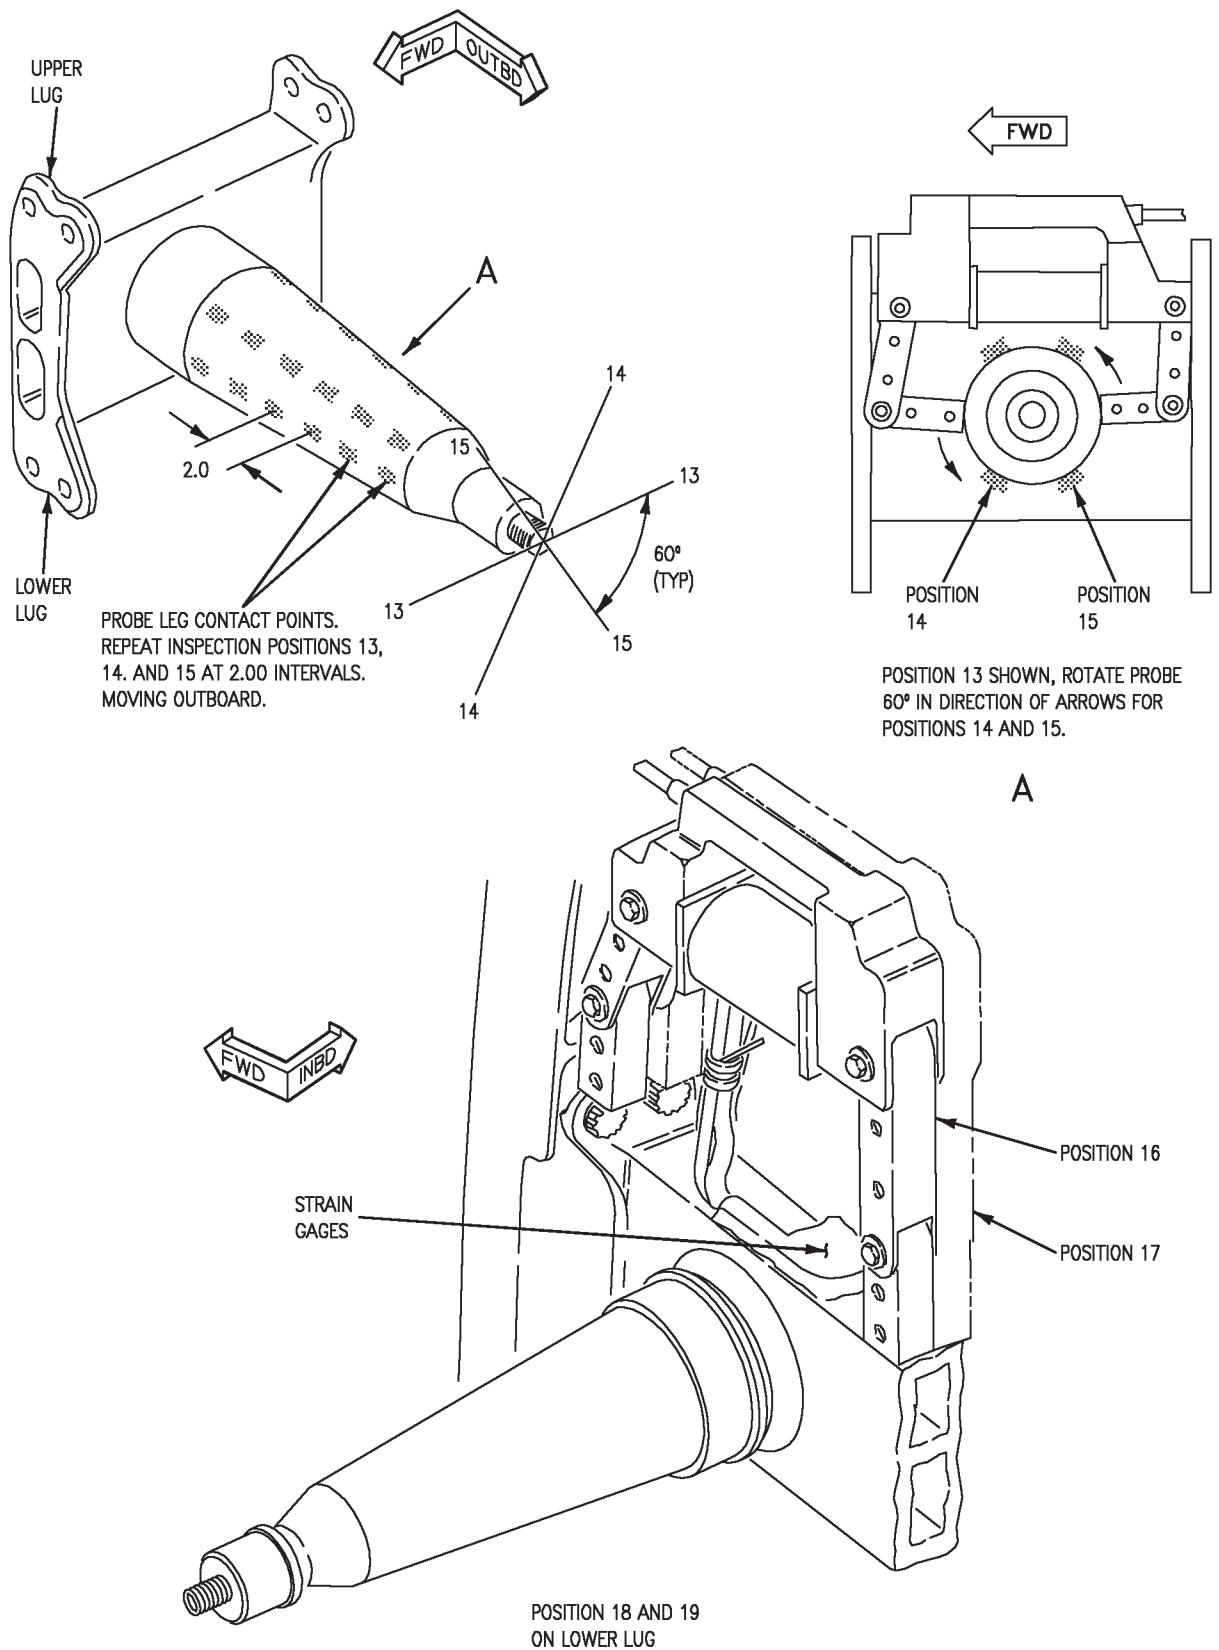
Horizontal Stabilator Spindle Inspection Areas and Typical Flaws
